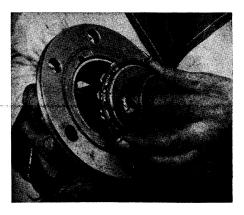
Remove pinion bearing cone and washer from cage assembly
